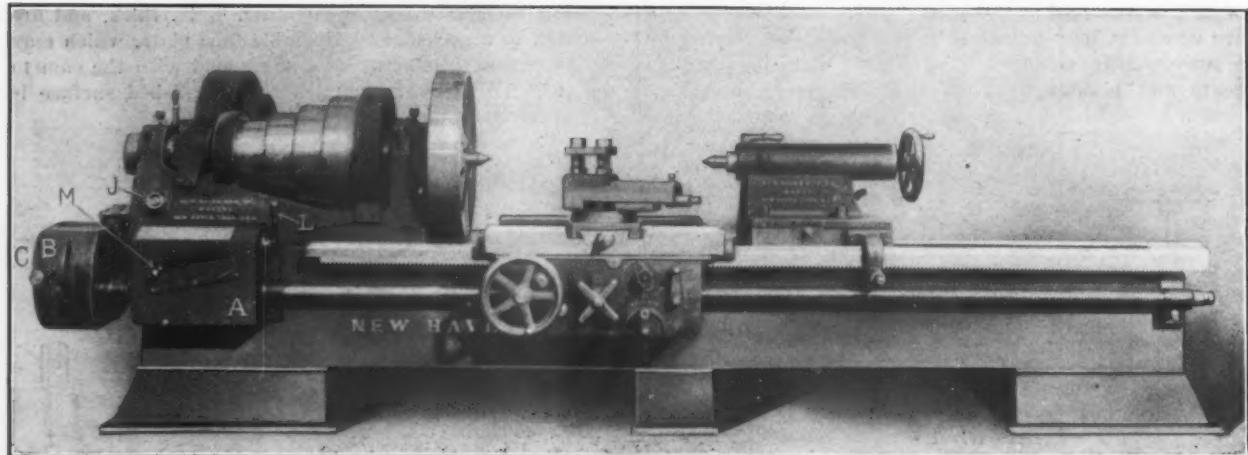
The New Heavy 28-In. Lathe Built by the New Haven Mfg. Company.
